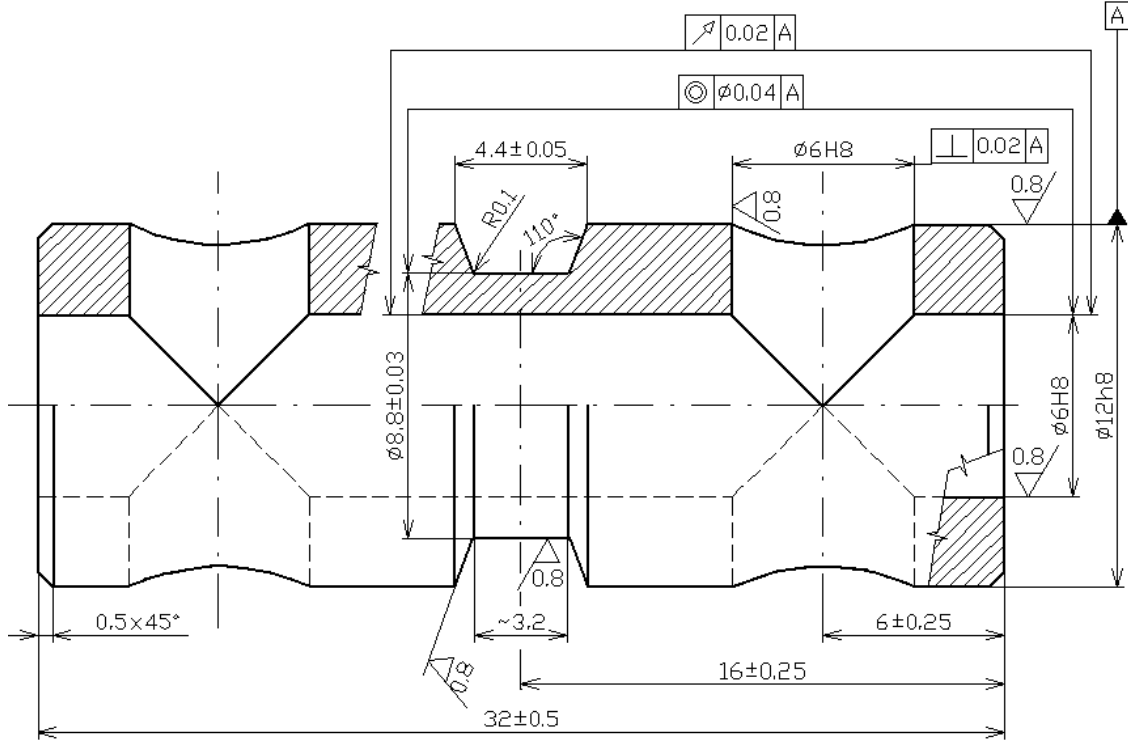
An enlarged manufacturing diagram of the laboratory short specimen from steel 14 109.
